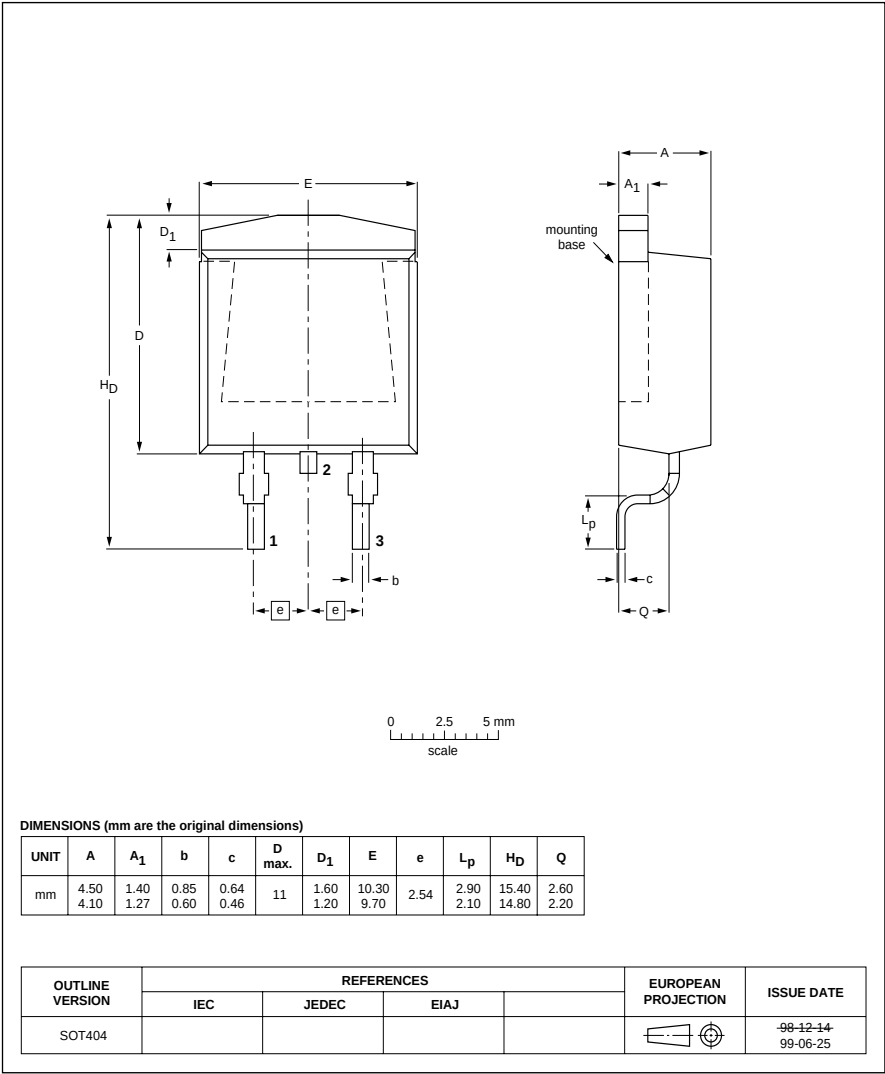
SOT404 surface mounting package. Centre pin connected to mounting base.
